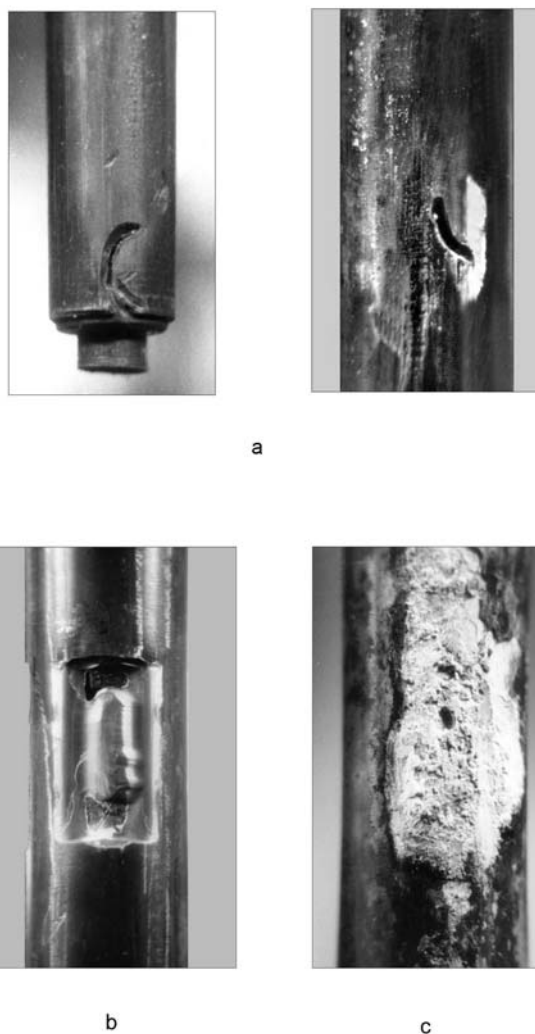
Primary damage of the fuel rod claddings: a) debris-fretting; b) “grid-rod” fretting; c) corrosion damage
